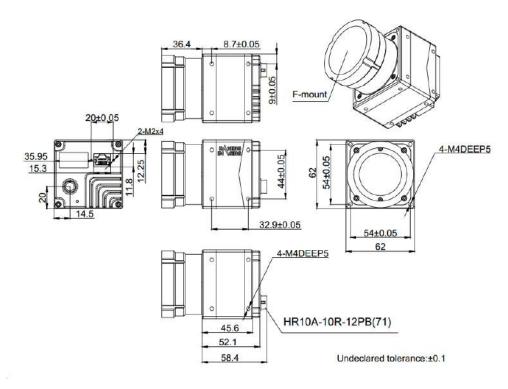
MARS-3140-3GM/C-P-M02 mechanical dimensions
